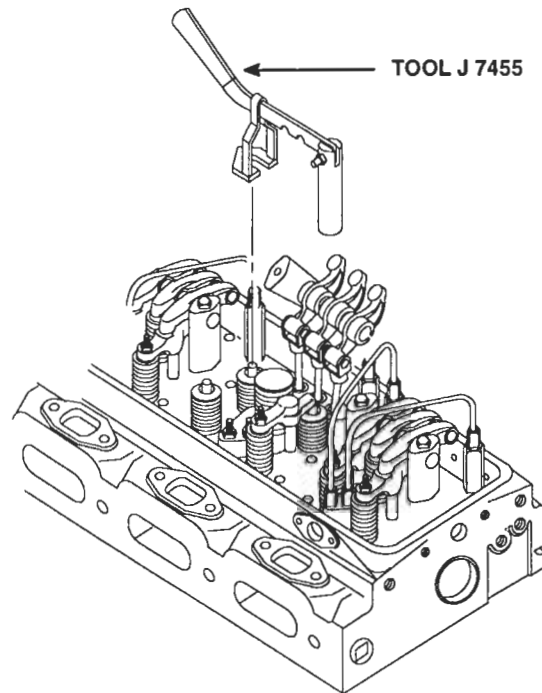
Removing Exhaust Valve Spring (Four-Valve Head Shown)
